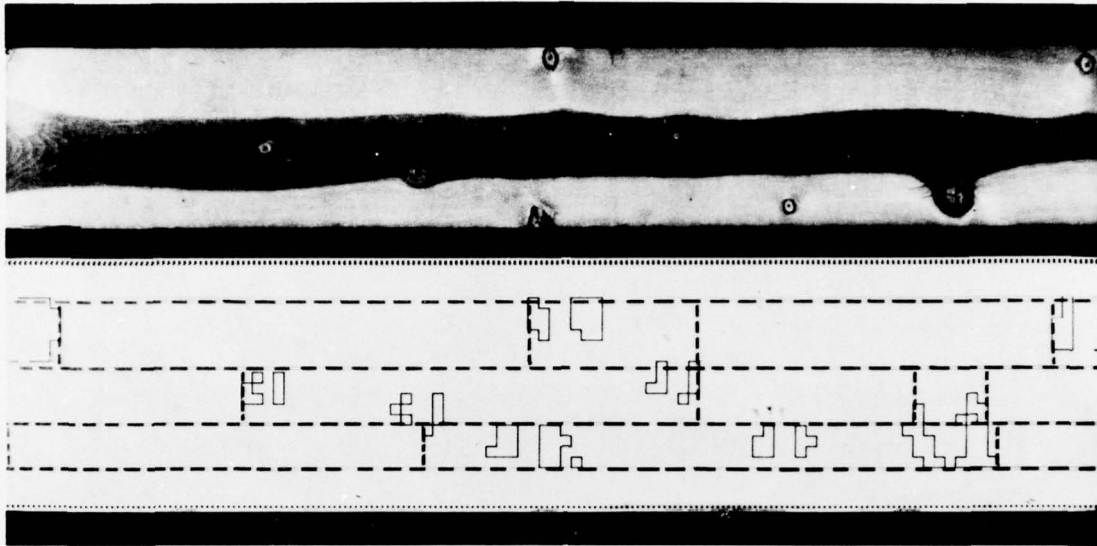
A section of a board ultrasonically scanned showing the ripping and crosscutting solution to remove defects and obtain clear cuttings.
